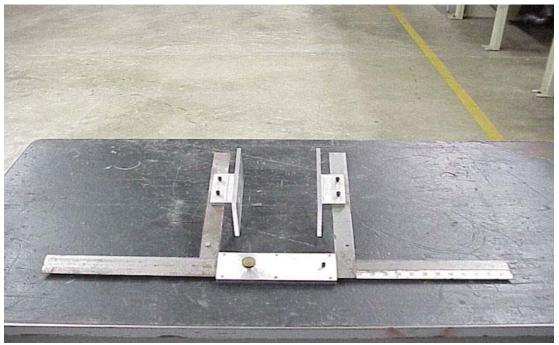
Two carpenters squares were joined together using a sliding mechanism with setscrews. Wide flanges were added to help measure the thickness at the hump.
